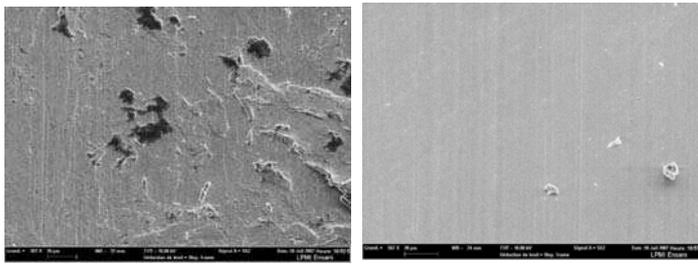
SEM photos of the machined surfaces in (a) CM and (b) LAM.
